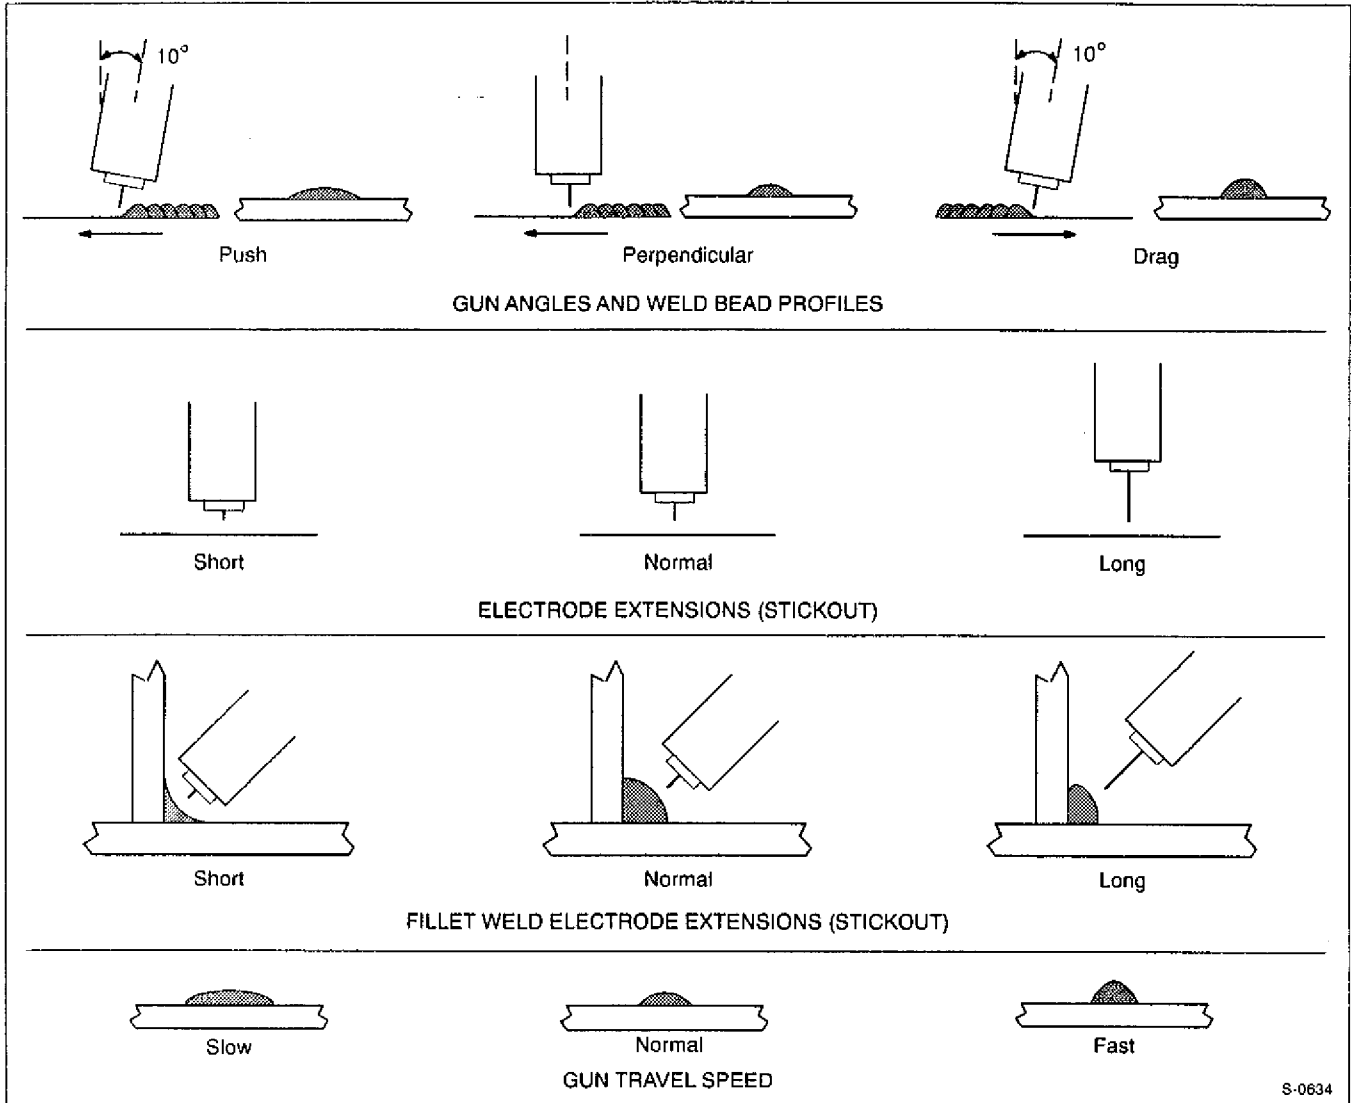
Conditions That Affect Weld Bead Shape
